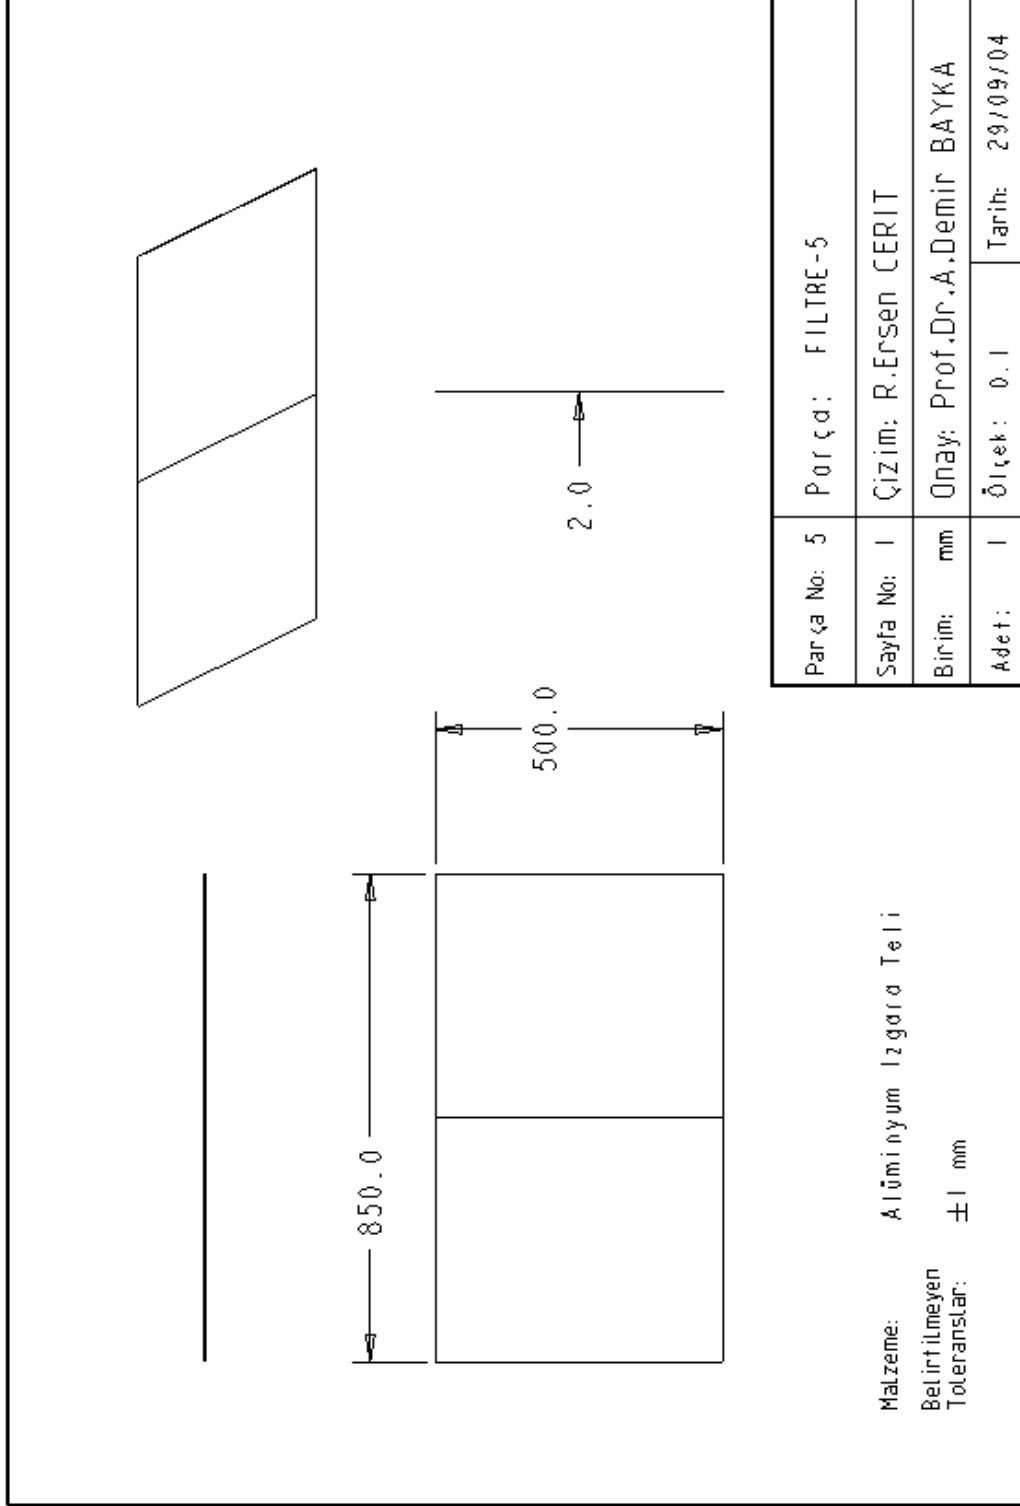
Technical Drawing of Aluminum Wire Sheet
